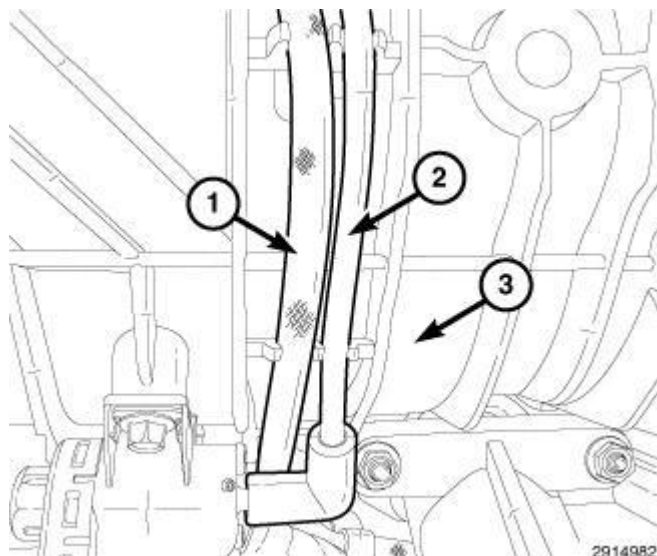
Fuel Injector Return Line, Vacuum Line & Intake Manifold
